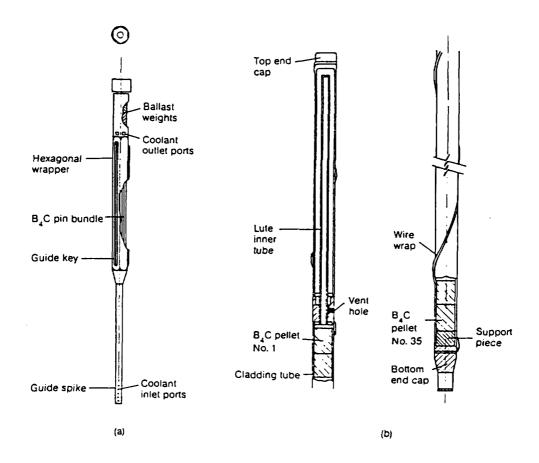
PFR Mk II control rod: (a) rod housing (b) pin.
